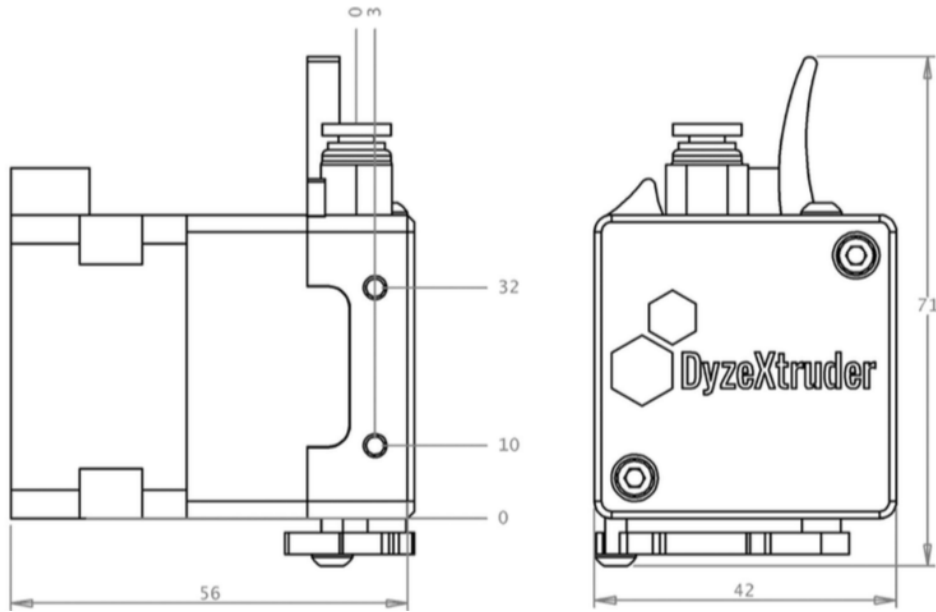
Technical Drawing of DyzeXtruder GT Extruder
